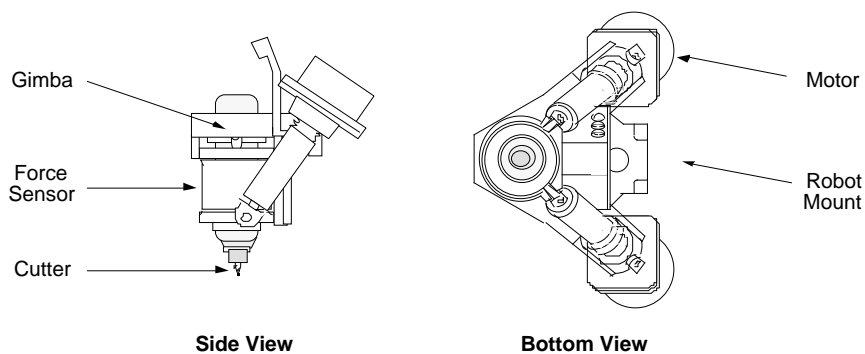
The Adaptive Deburring Tool. The tool consists of a high-speed spindle and rotary file mounted in a two degree-of- freedom motorized housing
